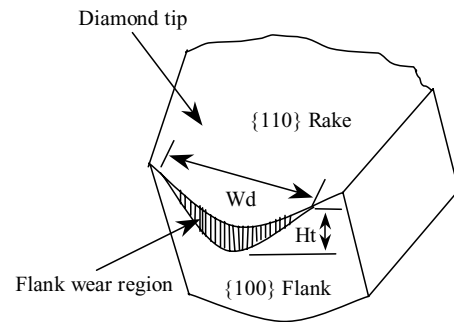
Typical flank wear and its measurement for a diamond tool.
